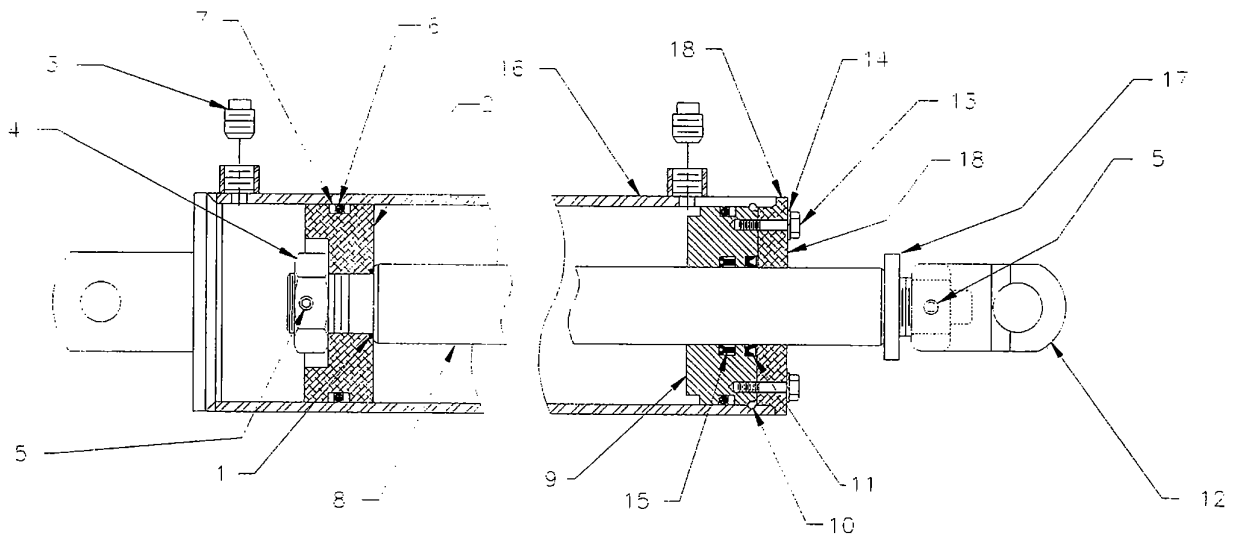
HYDRAULIC CYLINDER & HOSES (WELDED STYLE)
